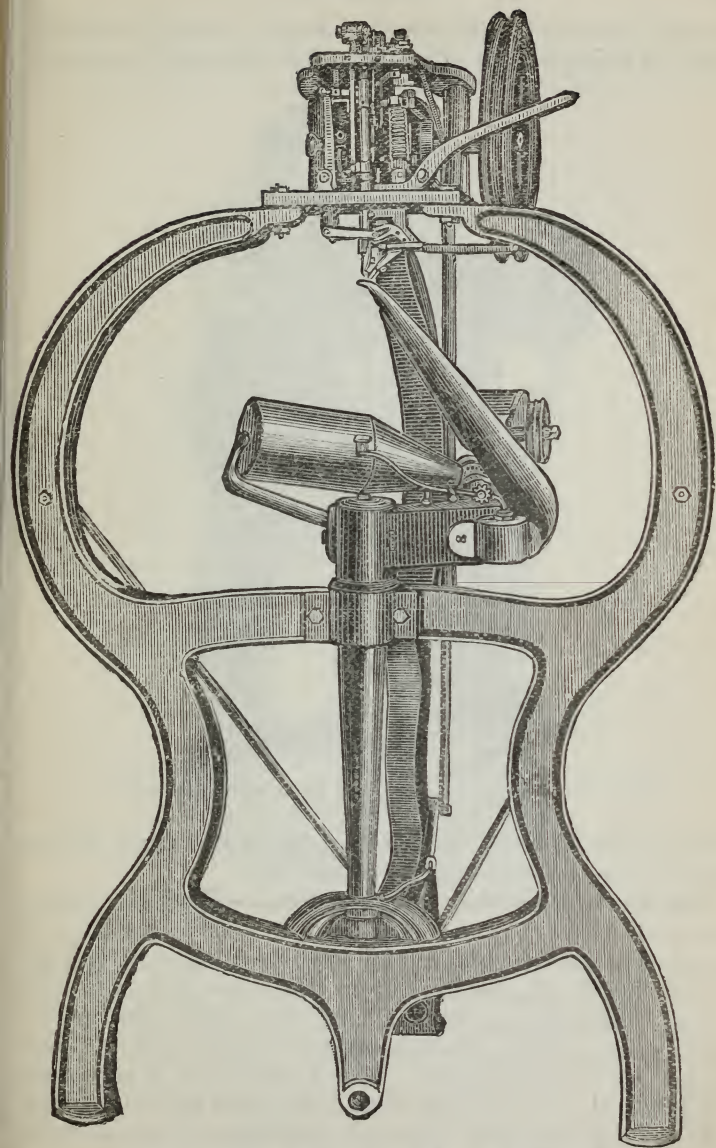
HIGH SPEED SOLE SEWING MACHINE.
